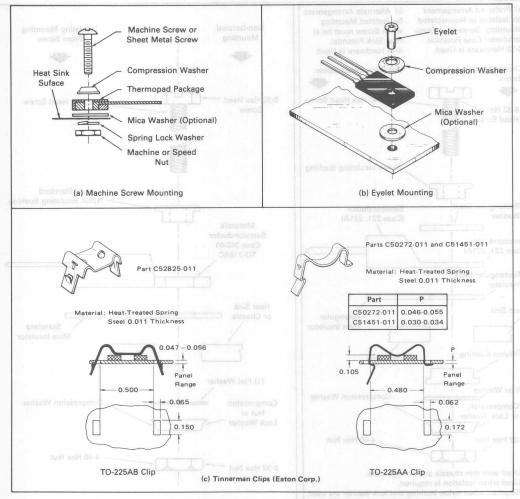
RECOMMENDED MOUNTING ARRANGEMENTS FOR TO-225AA (TO-126)
